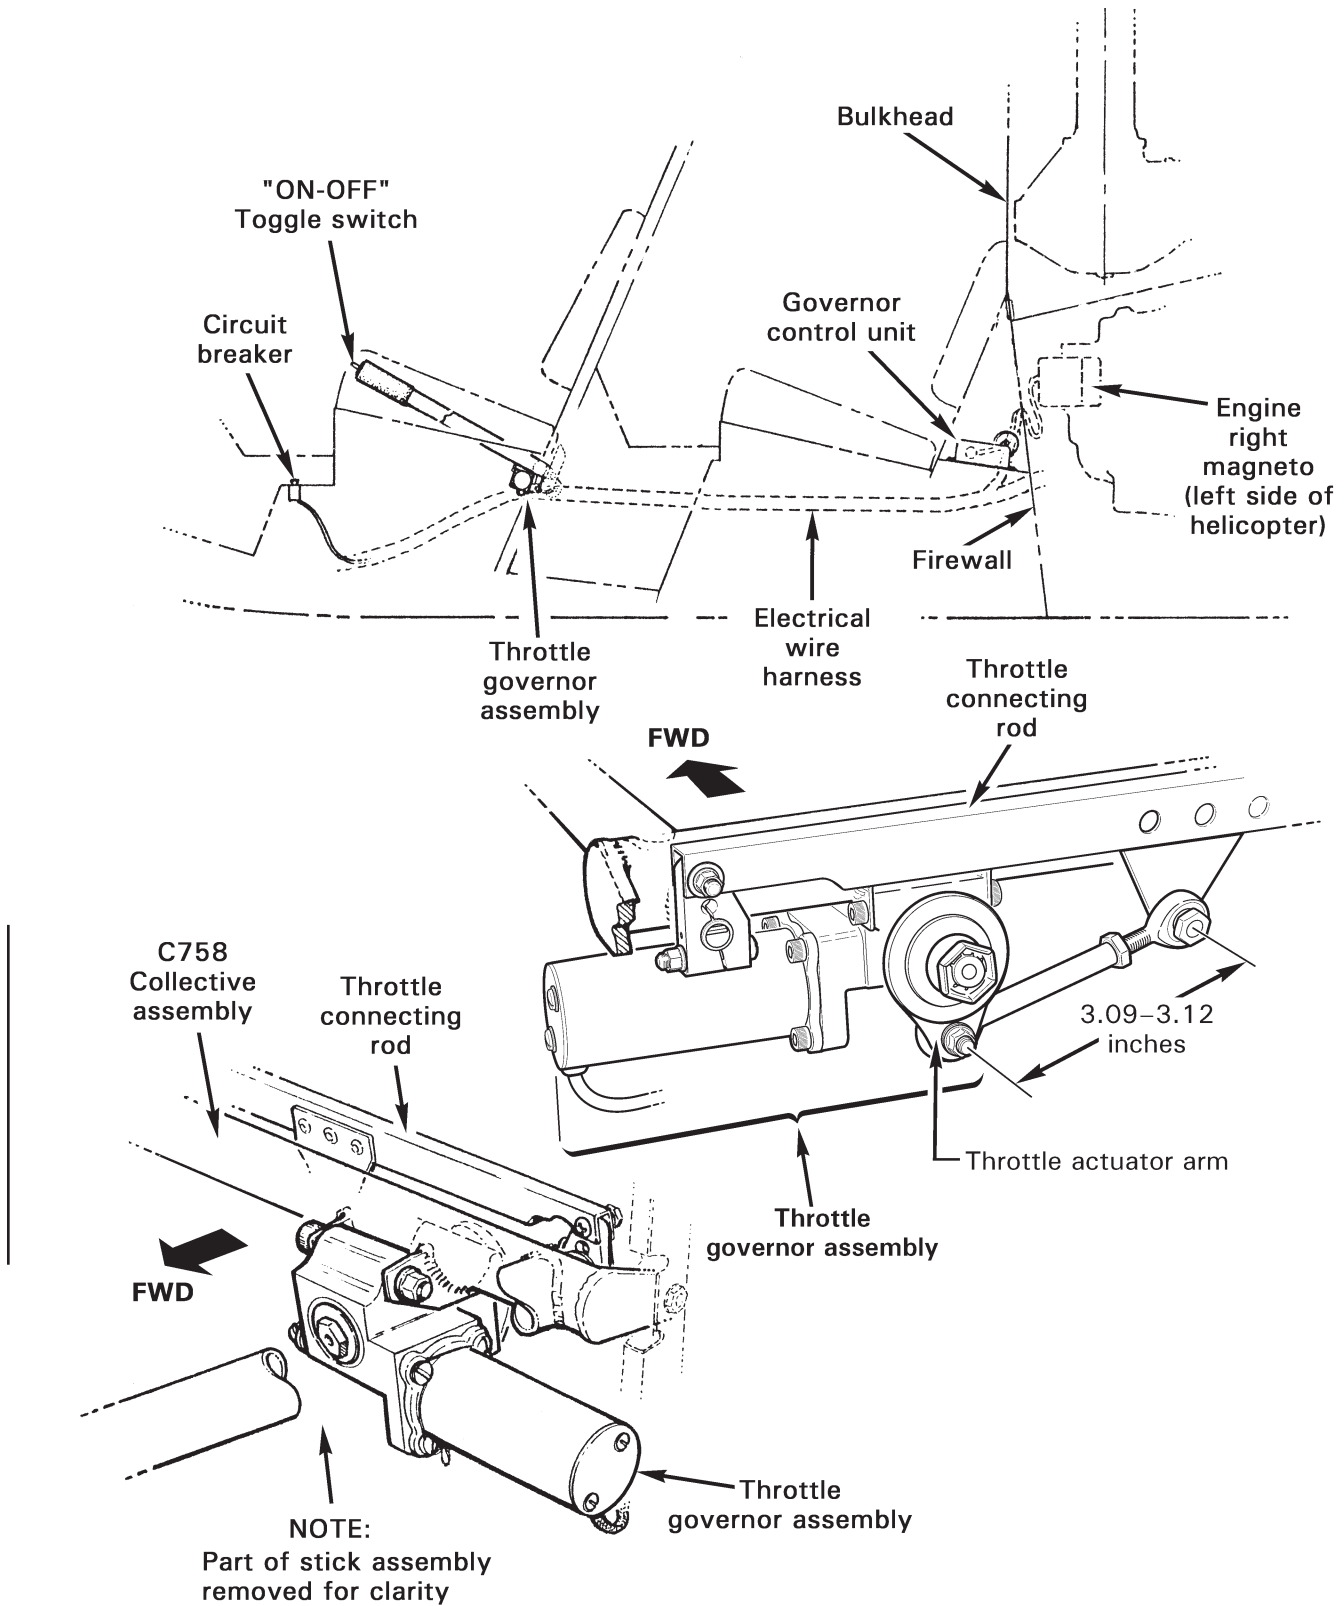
A THROTTLE GOVERNOR INSTALLATION
